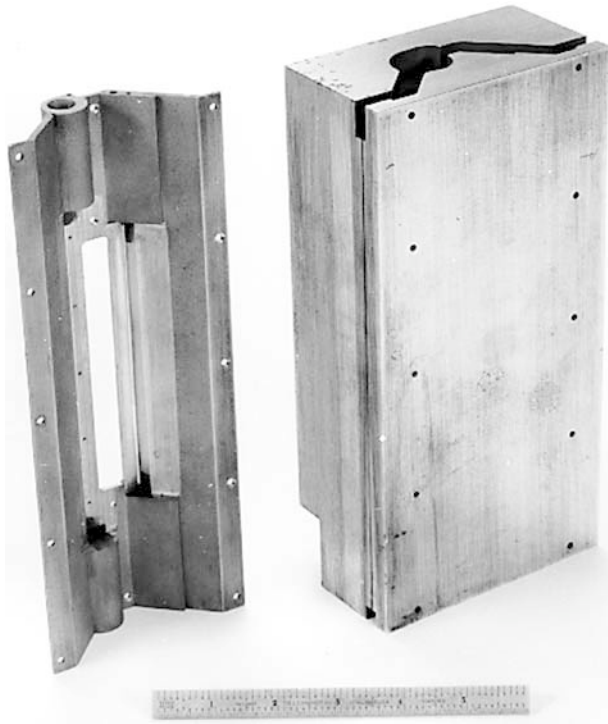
This Cassini collimator door hinge was produced using both wire and die-sinking EDM. The basic deep draw shape of the hinge was made very efficiently by using a single wire EDM cut. Some of the undercutting to make interior bearing seats could not have been done using conventional machining.
